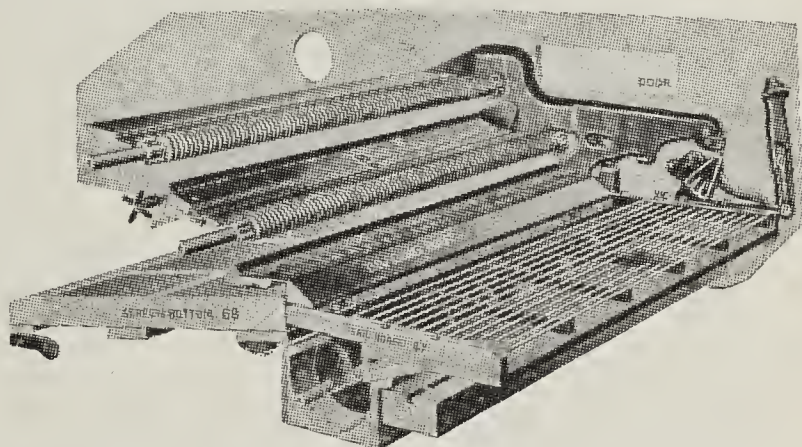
COMBS AND ROLLERS USED IN PLACE OF SIEVES IN GEISER SEPARATOR.
